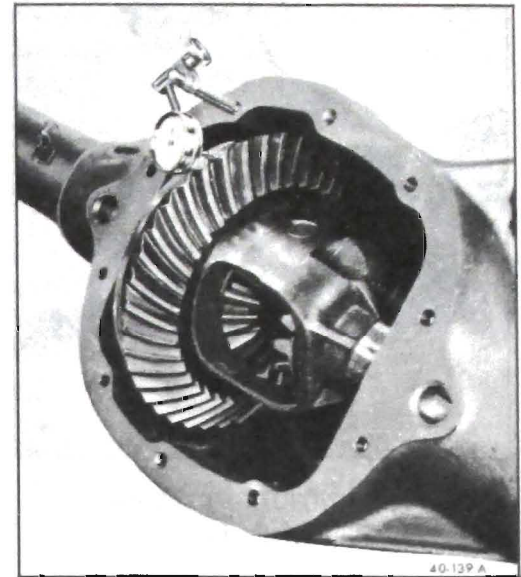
Checking Ring Gear to Pinion Backlash
